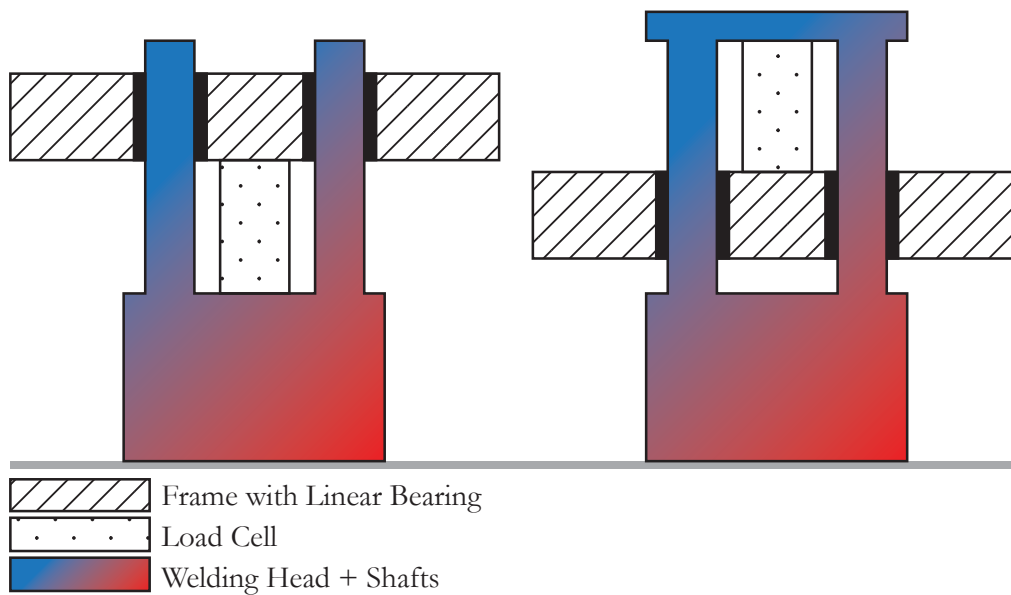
Positioning the loadcell on top of the frame gives a cooler mounting point on the welding head.
